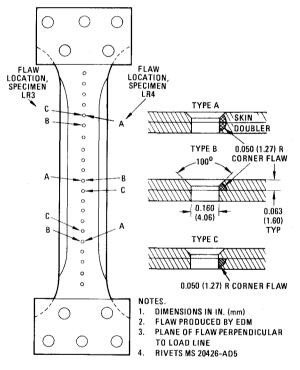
Low-load transfer fatigue specimen with preflawed rivet hole.
